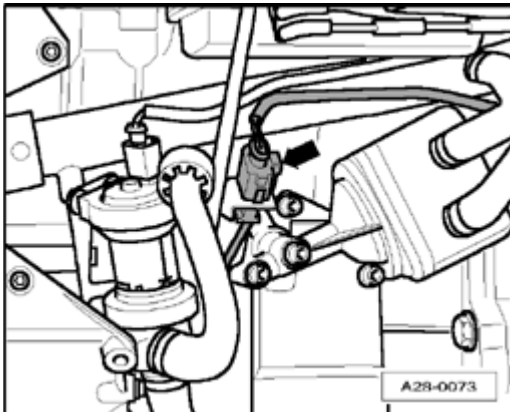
Removing Connector For Engine Speed (RPM) Sensor -G28- From Retainer On Oil Dipstick Guide Tube
